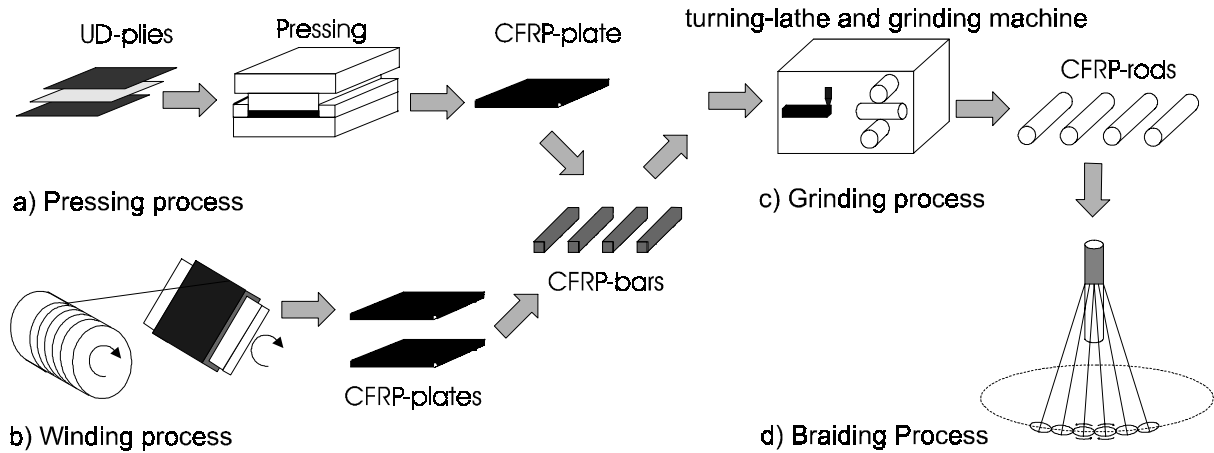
Schematic illustration for fabricating CFRP-Rod
